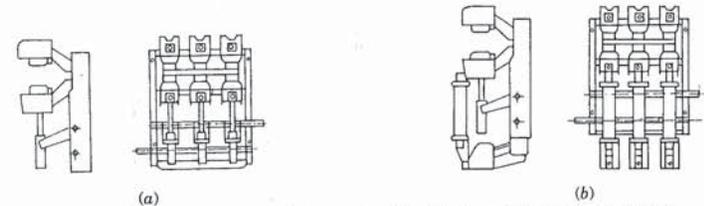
Slide-in type switch-disconnector: (a) without and (b) with fuse assembly
